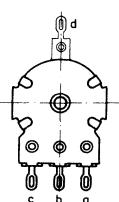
Single potentiometer with mounting bushing. For dimensions d and L, see Spindles.
